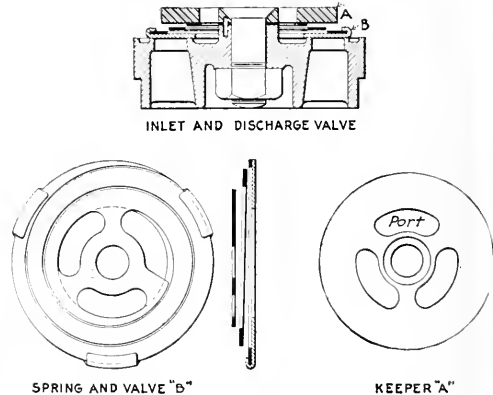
MESTA MACHINE CO.'S PLATE VALVE
